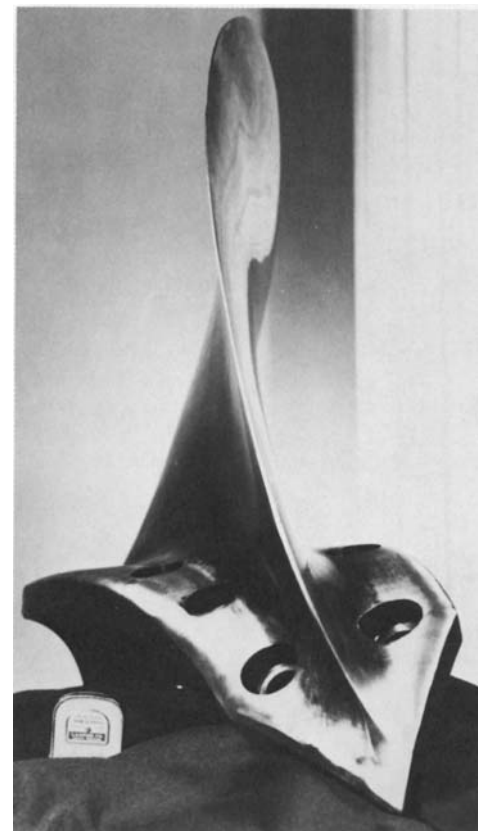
Forged and machined alloy 718 marine propeller blade. Courtesy of Ladish Company
